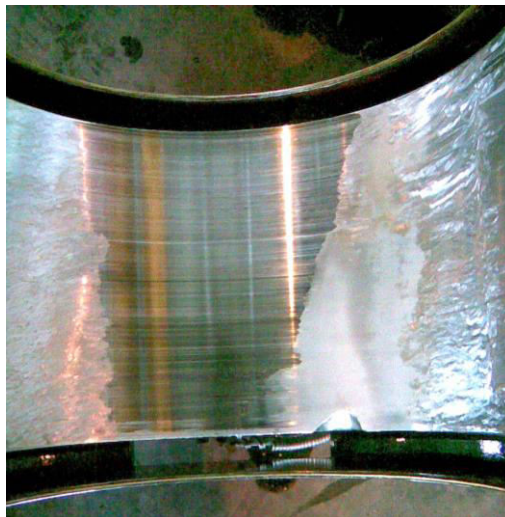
Damage to the lower half of the bearing cup due to electro-erosion corrosion.
